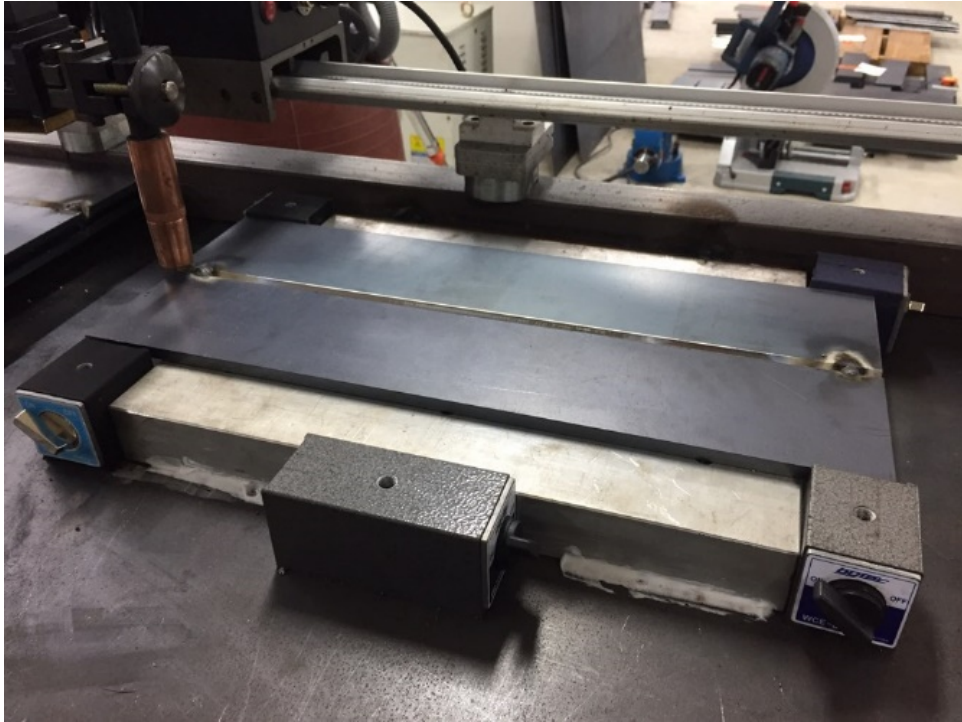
Weld specimen setup in Aluminum block jig with copper strip backing.
